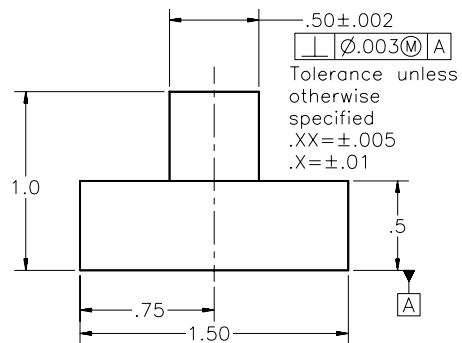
Geometric dimensioning and tolerancing
